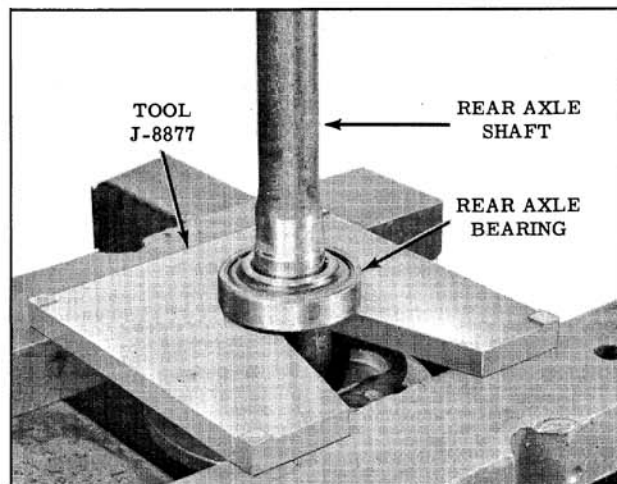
Removing Axle Bearing (33 through 52 Series)
